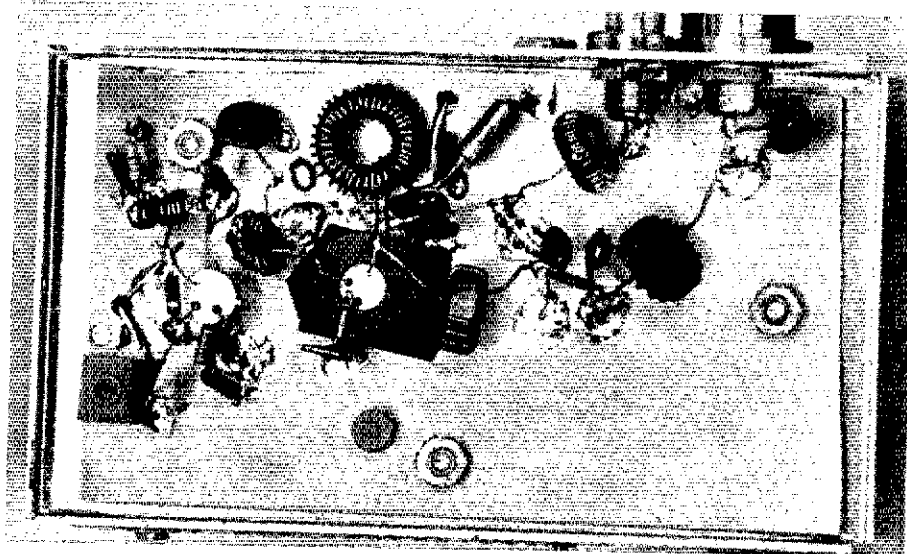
Photograph of the driver and PA assembly. Drive control R1 is visible at the lower left.
